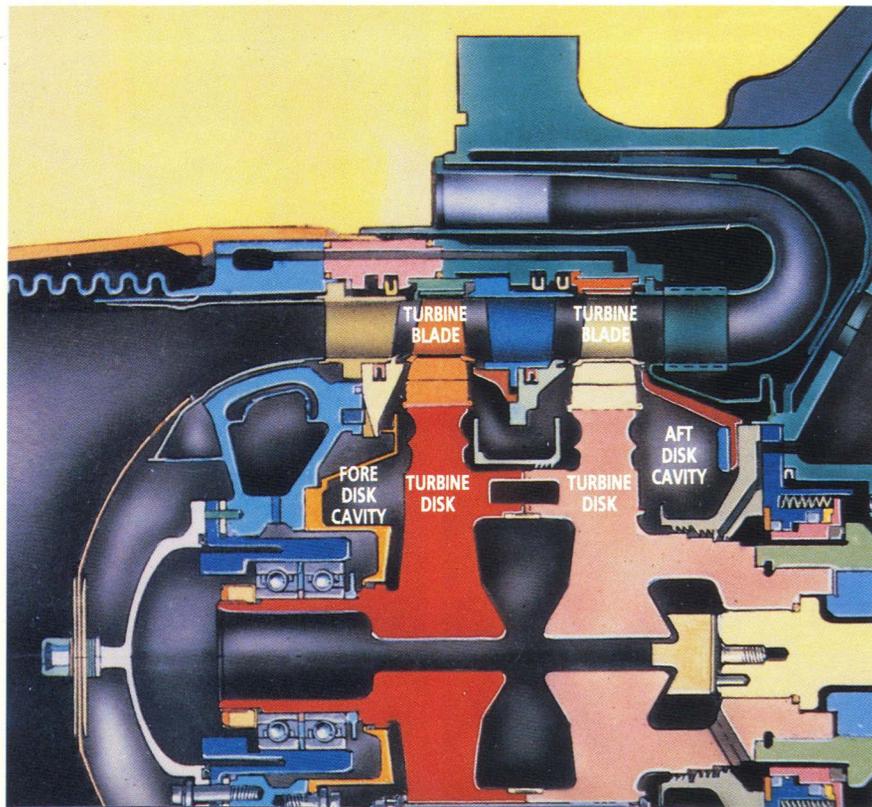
Cutaway of turbine end of Space Shuttle main engine high-pressure fuel turbopump.
